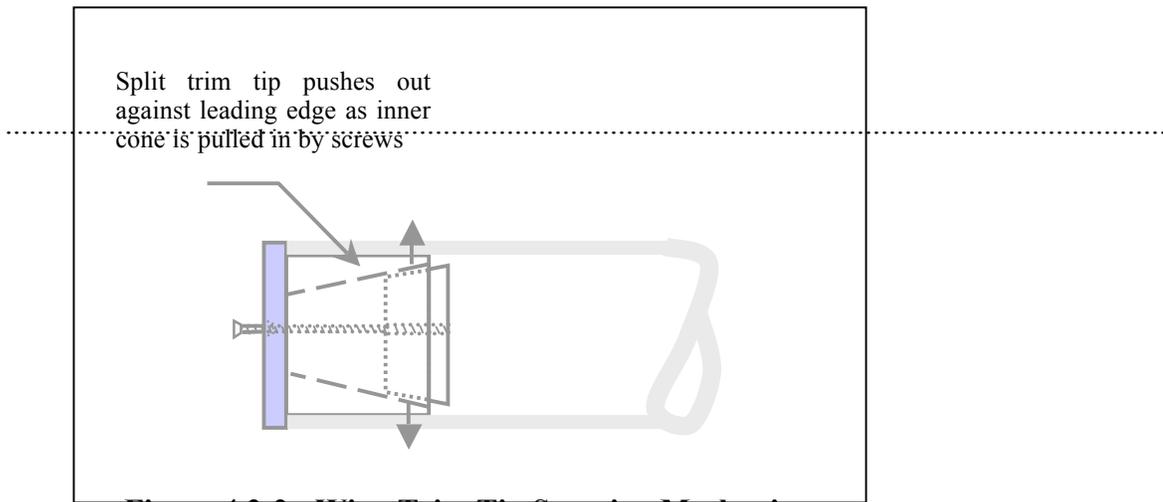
Wing Trim Tip Securing Mechanism
